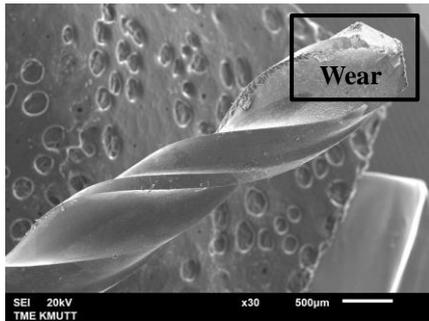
Wear of Drill coated by Si-N-DLC film after drilled at 200 holes.
